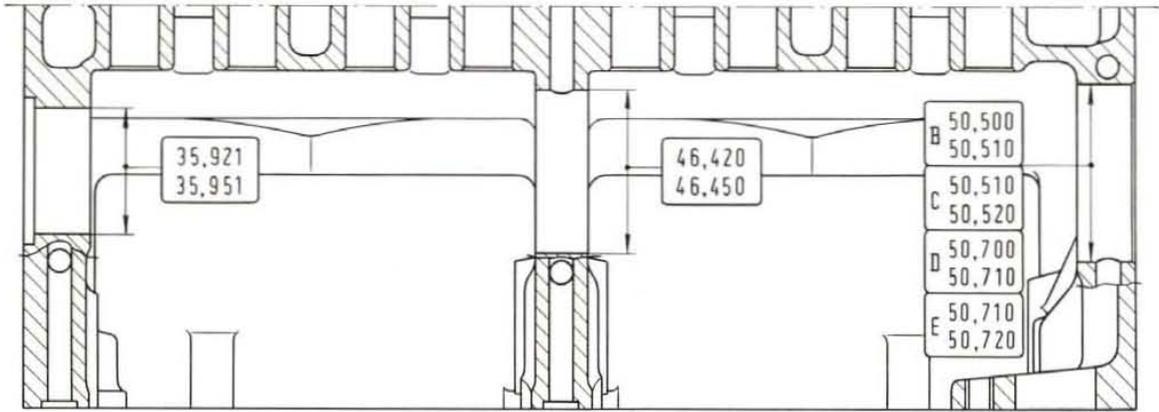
Critical dimensions (metric) of camshaft and bushings.
